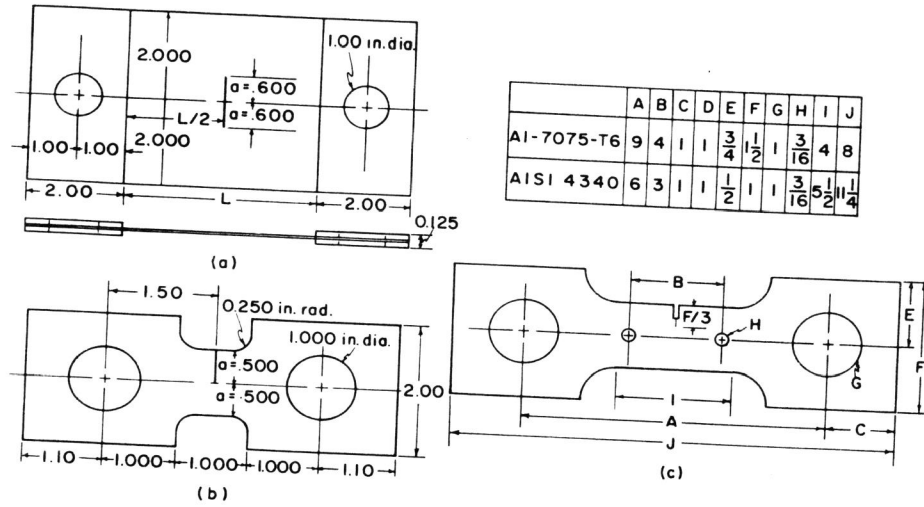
Design of (a) Center-crack, (b) Short single edge-crack and (c) Long single edge-crack specimen.
